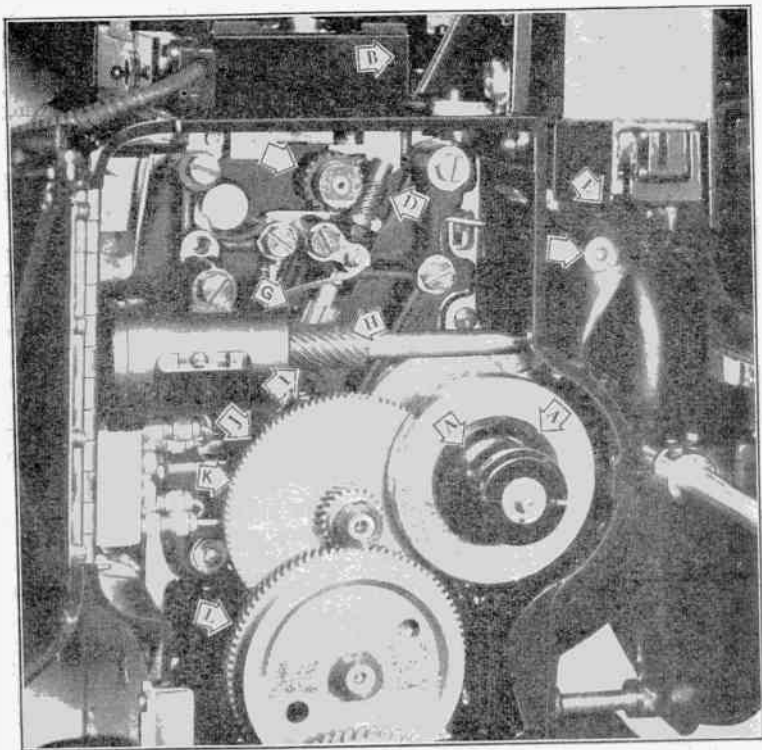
Simplex projector system. In the figure A, represents intermittent flywheel clamping screws; B, nickel plated cap covering hole through which oblique shaft may be removed; C, upper sprocket shaft driven gear; D, upper sprocket driving gear; E, fire shutter raising lever adjusting bushing lock screw; F, fire shutter raising lever adjusting bushing; G, shutter gear driving gear; H, shutter gear Woodruff key; I, shutter shaft gear; J, lower gear on an oblique drive shaft; K, intermittent drive gear assembly; L, main drive gear.
